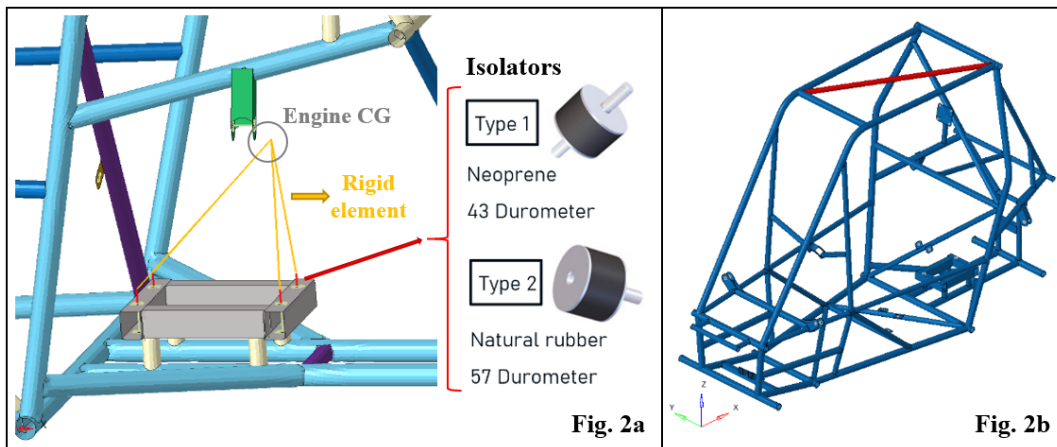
Countermeasures proposed: a) elastomeric engine mounts and b) roof reinforcement.
